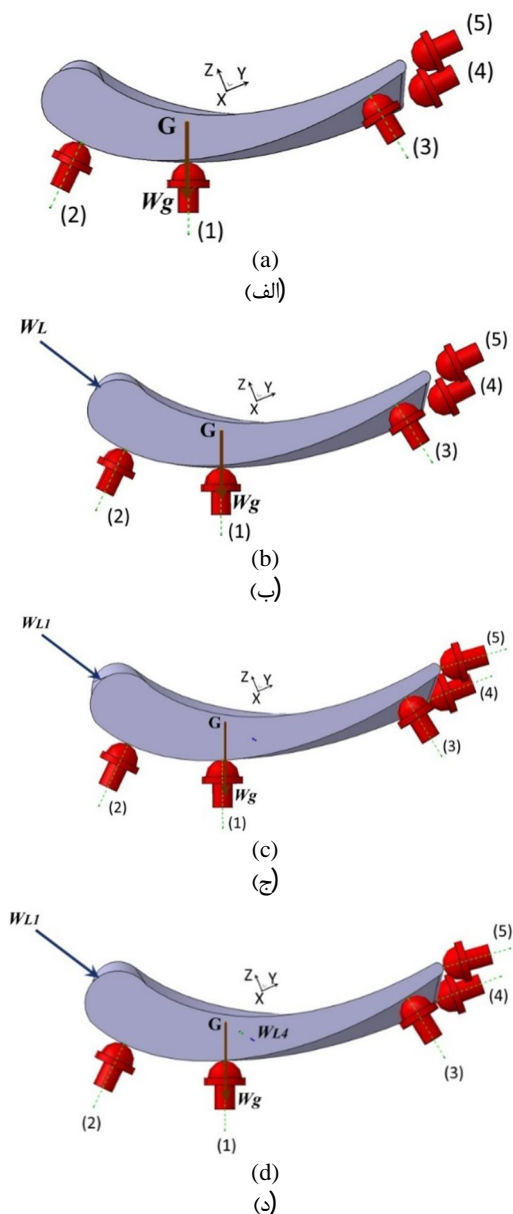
The procedure of workpiece loading into the fixture a) resting on the base locators b) the position of nearly contact the side locators c) making contact with the side locators while keeping contact with the base locators d) making contact with the stop locators while keeping contact with the base and side locators
